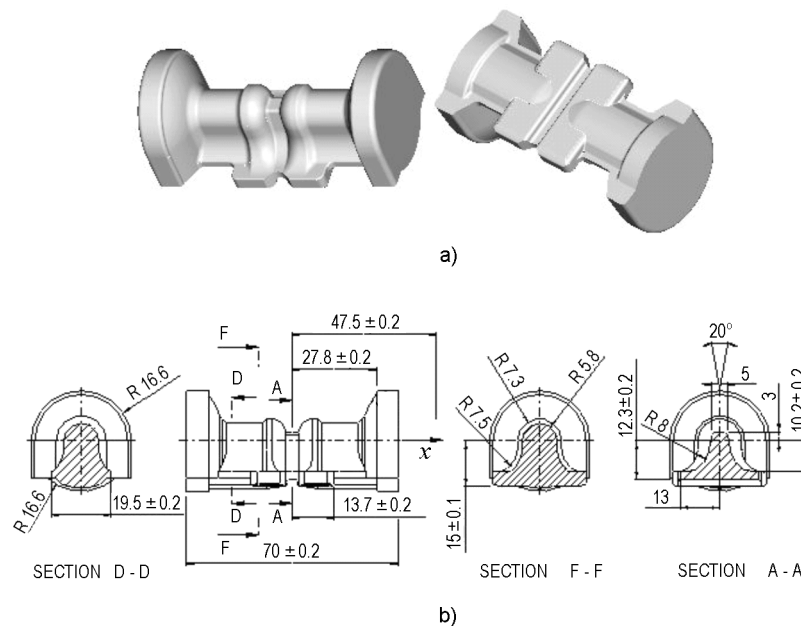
The forging of piston SC100-T6 Al-alloy (a) 3D-Modeling of the forging (b) The main dimensions of forging
